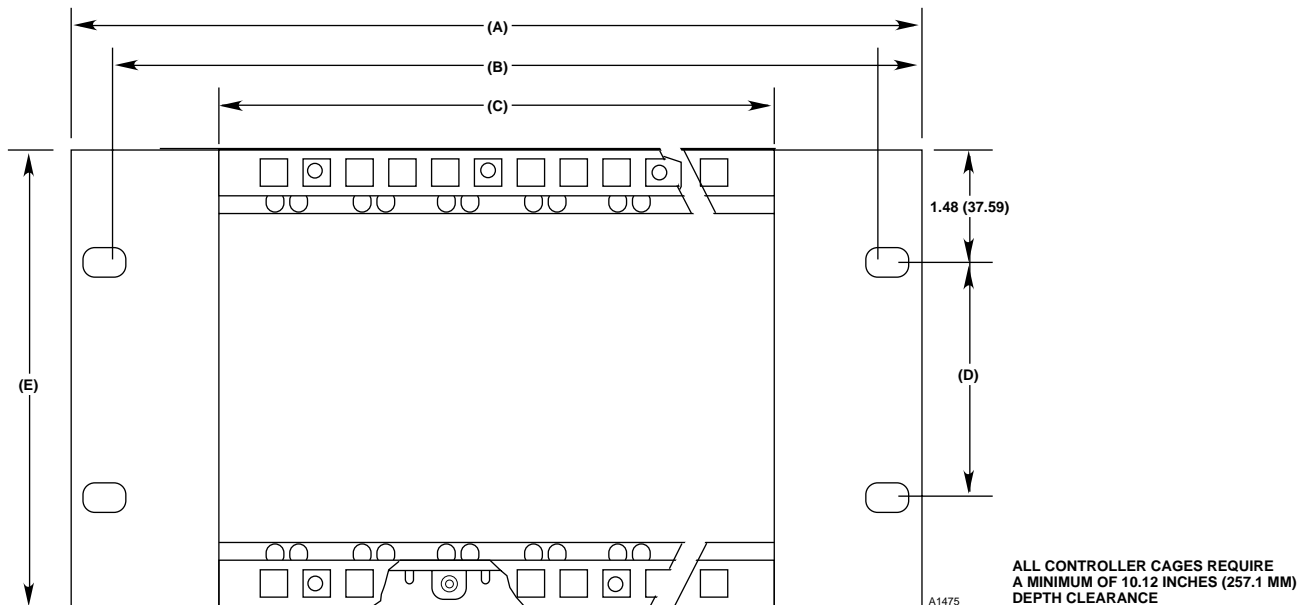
Dimensions of the Q4004 Mounting Rack in Inches (Millimeters)
